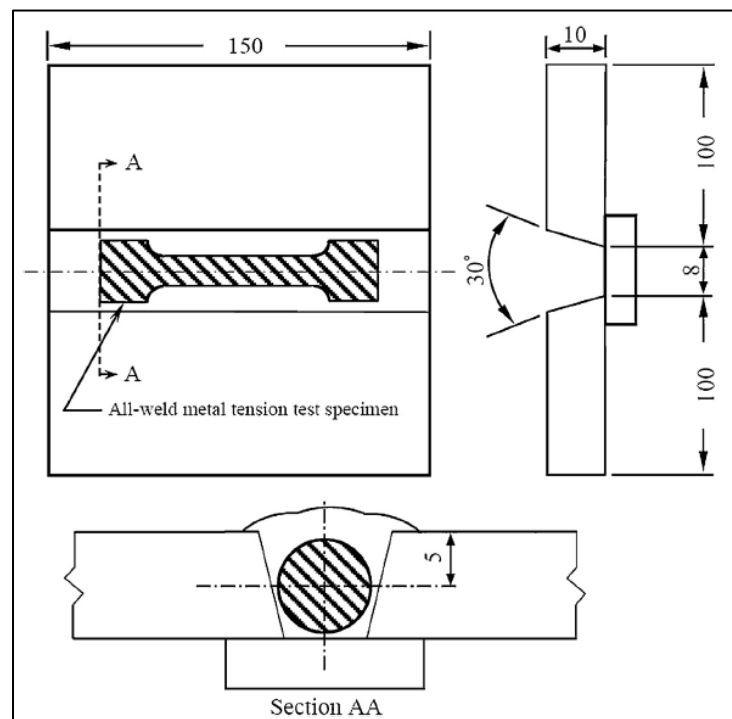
Weld test assembly showing the location of tensile specimen. All dimensions are in millimeters[13].
